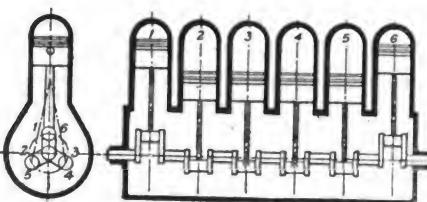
Usual six-cylinder motor, six cranks in three planes
